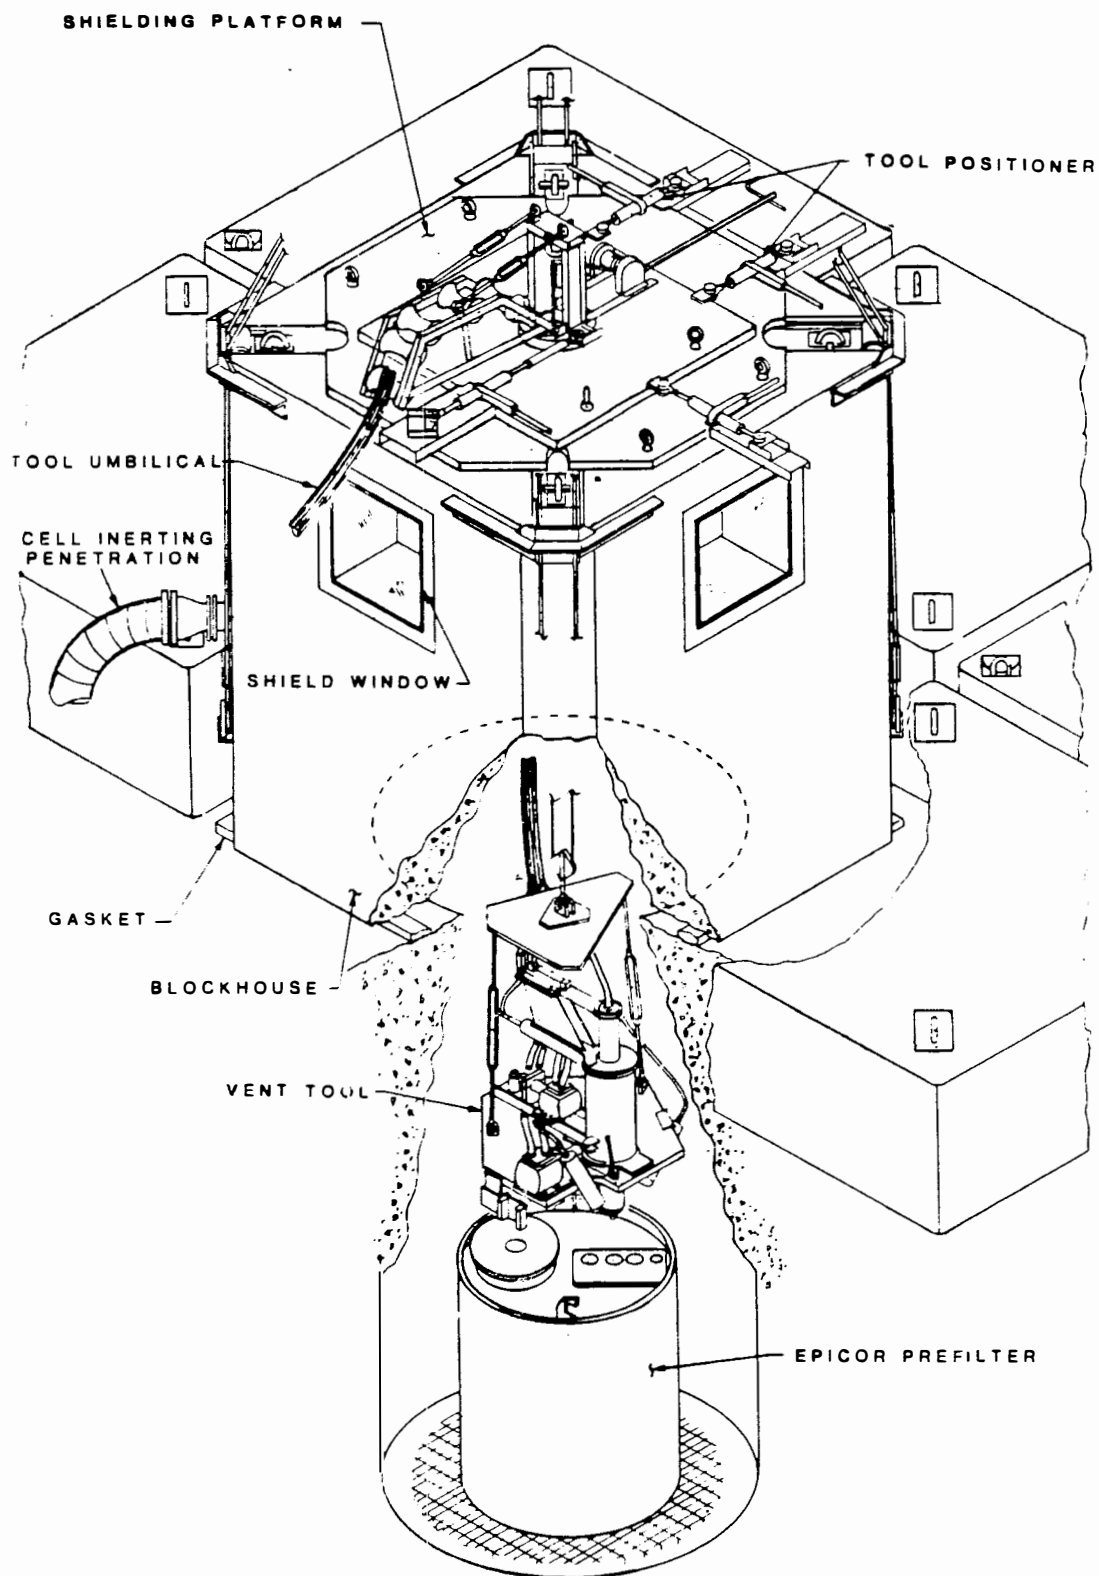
Isometric of the blockhouse, support assembly, and vent tool.
